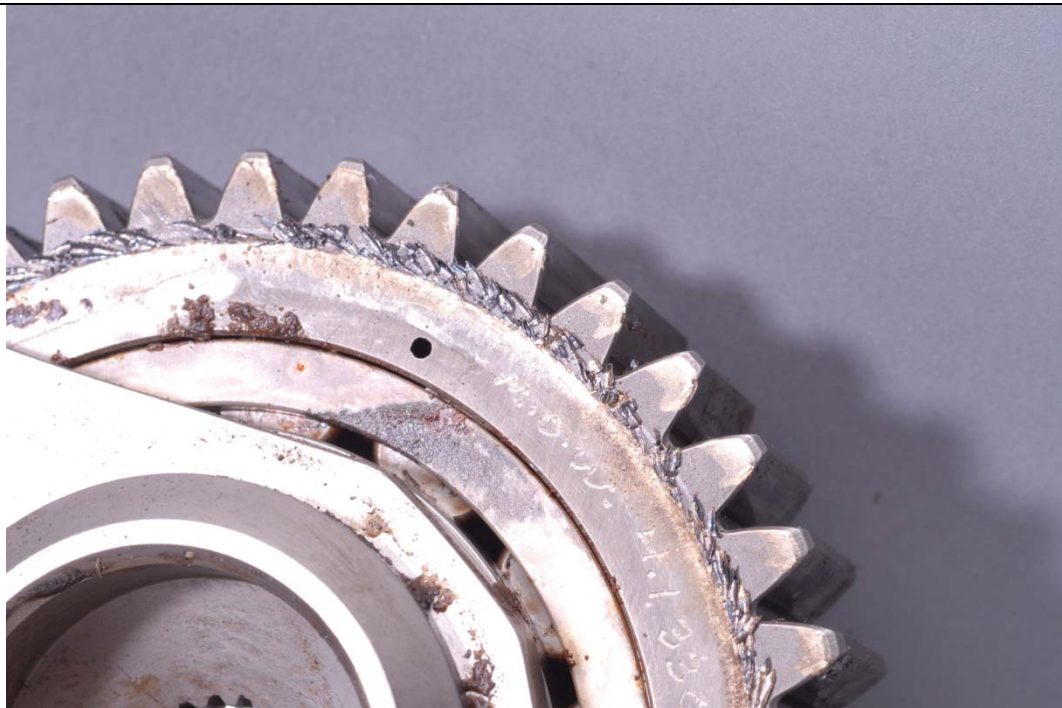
P-79297C, Planetary Gear Assembly, FLA
